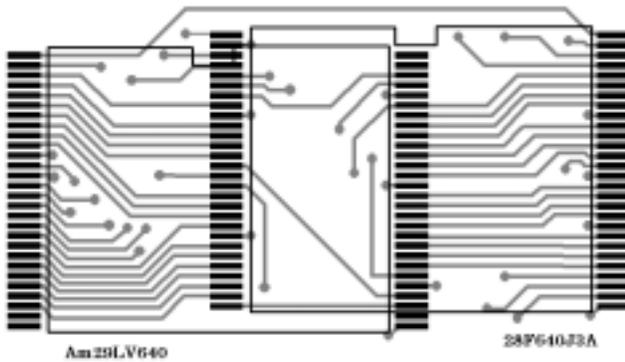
Multi-Sourced Layout for 64-Ball FBGA AMD Am29LV640 and 56TSOP Intel 28F640J3A (Layout I)
